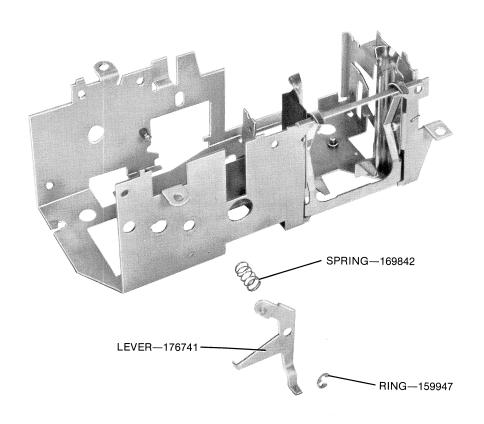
MECHANISM ASSEMBLY (800 and 800H PROJECTORS)—170741
